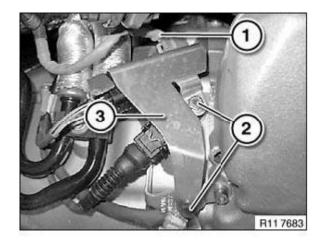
Identifying Oxygen Sensor Cable And Screws Courtesy of BMW OF NORTH AMERICA, INC.
